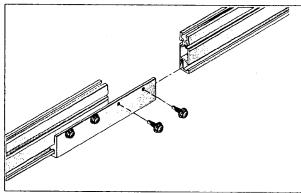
Splice bars slide into the footing bolt slots of SolarMount rail sections.
